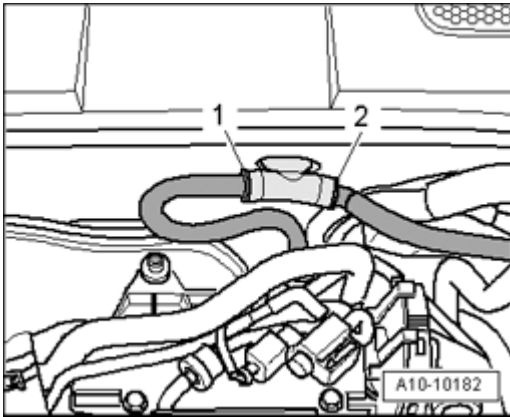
Removing Vacuum Hoses From T-Piece On Bulkhead
